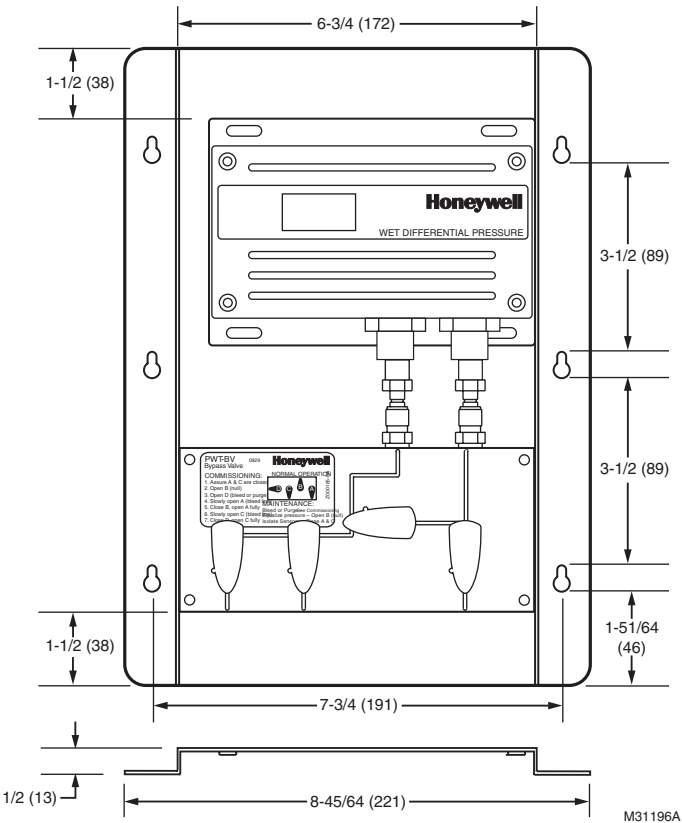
Dimensional Drawing of PWT-BV Bypass Valve Manifold showing PWT (not included) for Reference Only.
